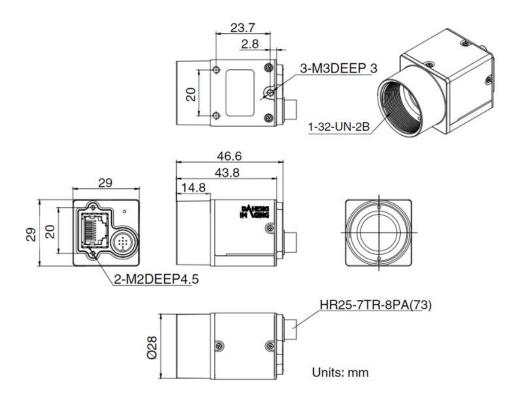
MER2-532-22GM/C mechanical dimensions
